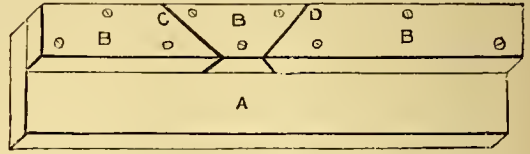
SIMPLE MITRE-BOARD FOR FRAME MAKING.
